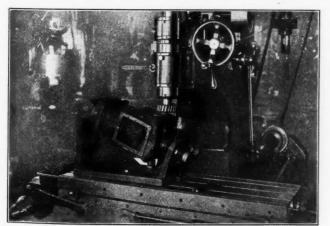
Fixture for Holding Cylinder while facing Exhaust Pipe Flange Bosses
